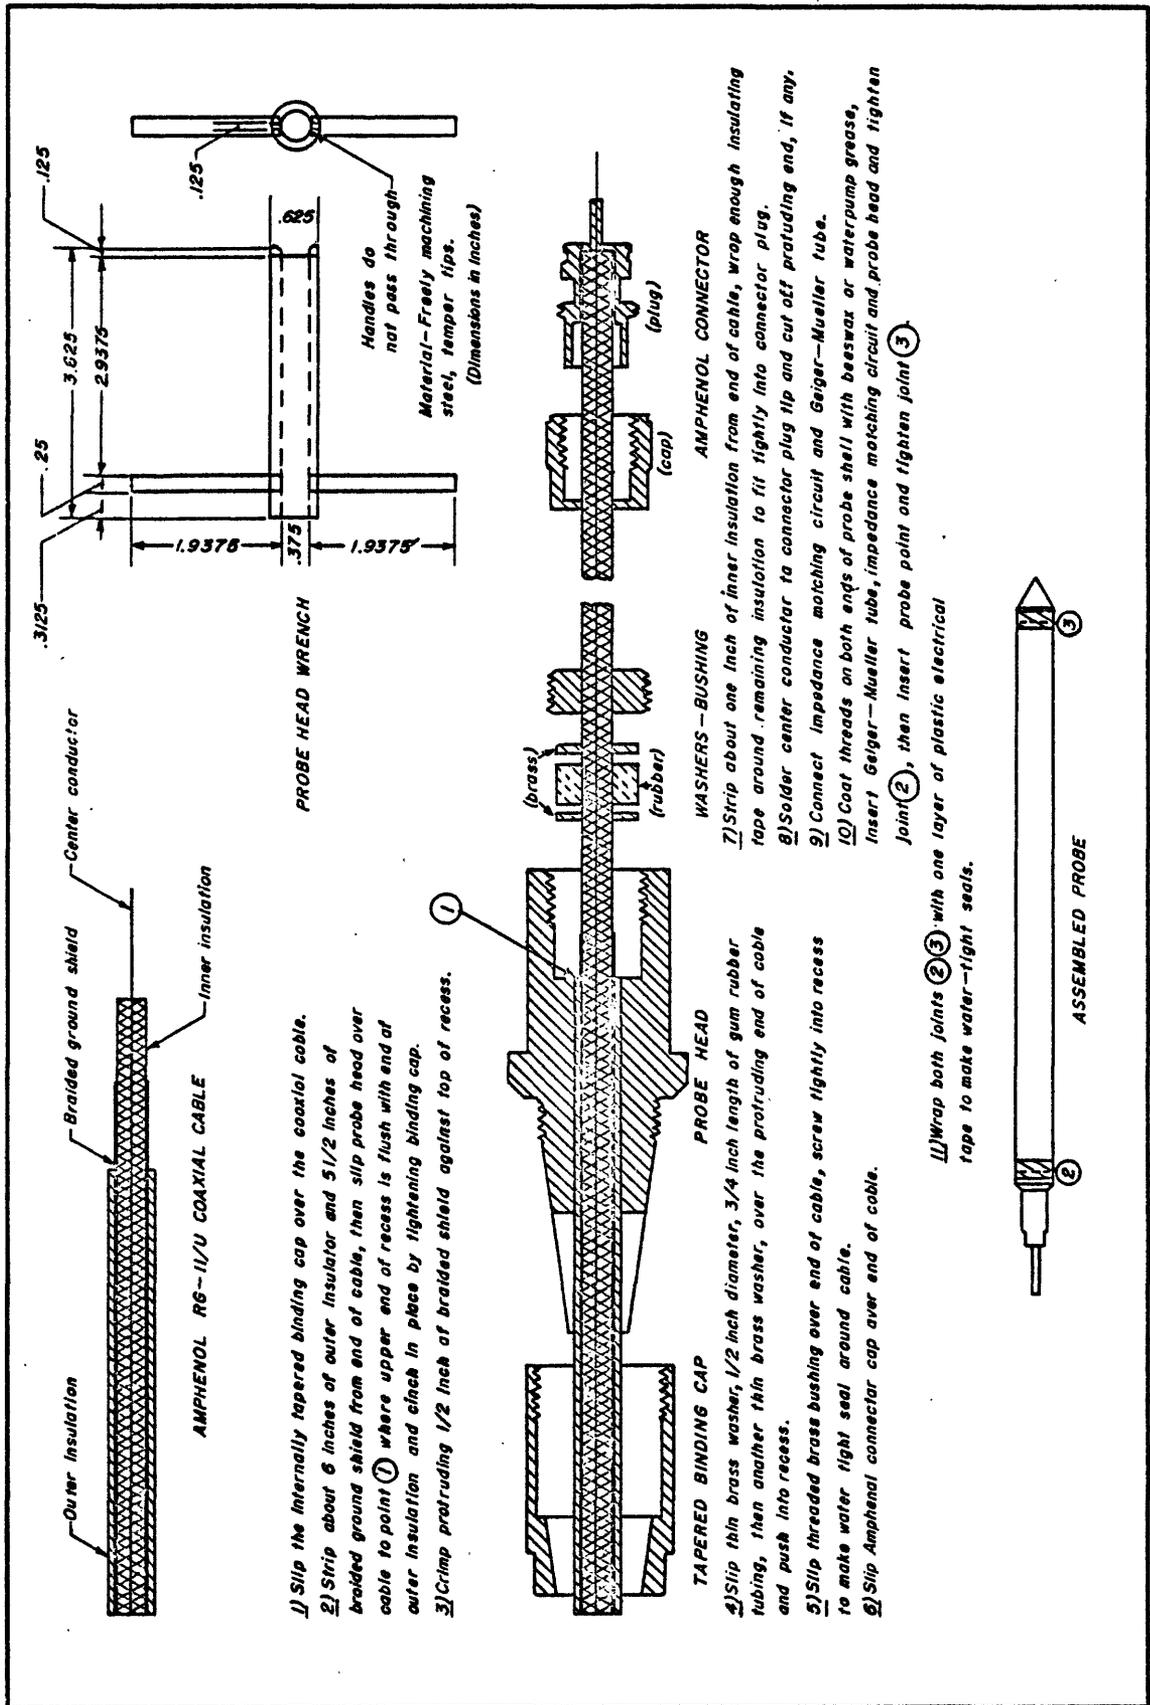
DIRECTIONS FOR ASSEMBLING PROBE HOUSING.
